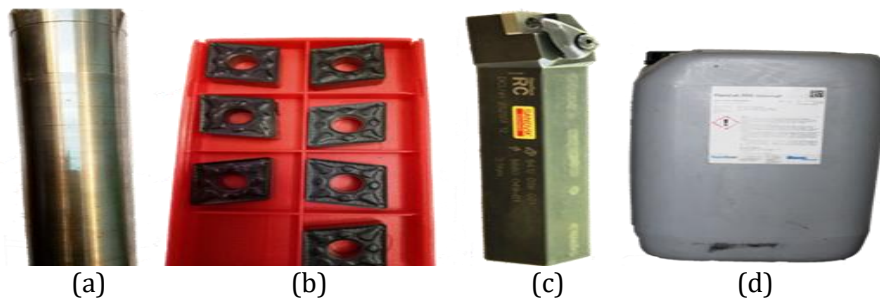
(a) Work-piece material, (b) coated carbide inserts, (c) tool holder and (d) blasocut 2000 cutting oil.
